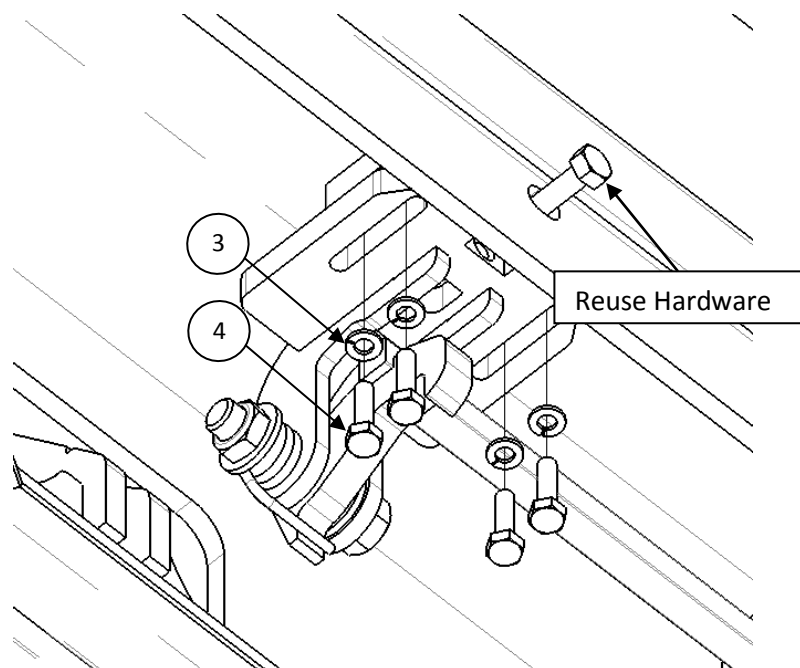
Slam Latch Hanger Reassembly (passenger side shown).
